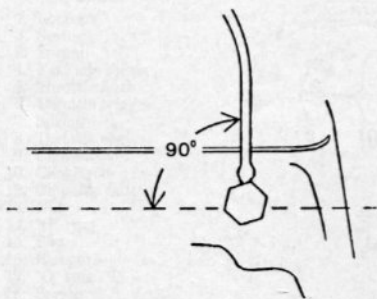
Oil line and fitting in oil tank must be angled close to 90° as shown above.
